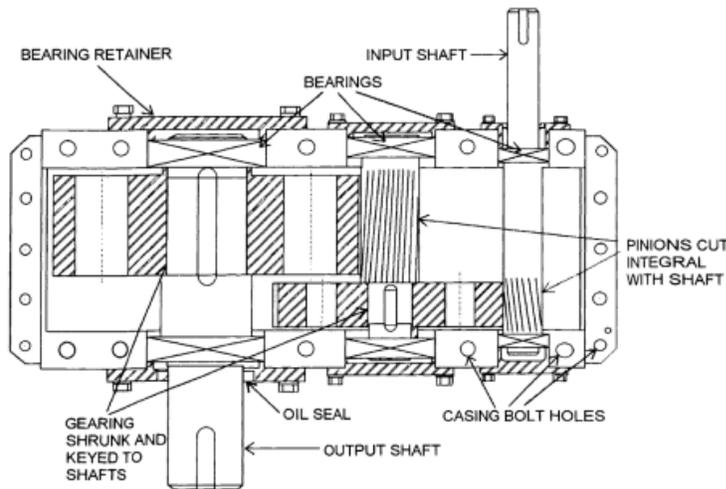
Offset helical gear parallel shaft speed reducer
